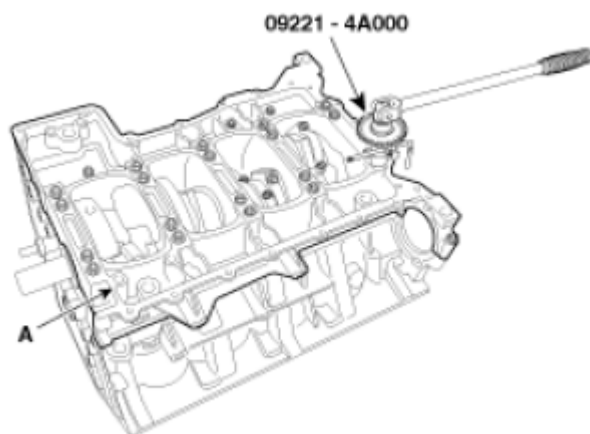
Installing Bearing Cap Bolts Using SST(09221-4A000)
